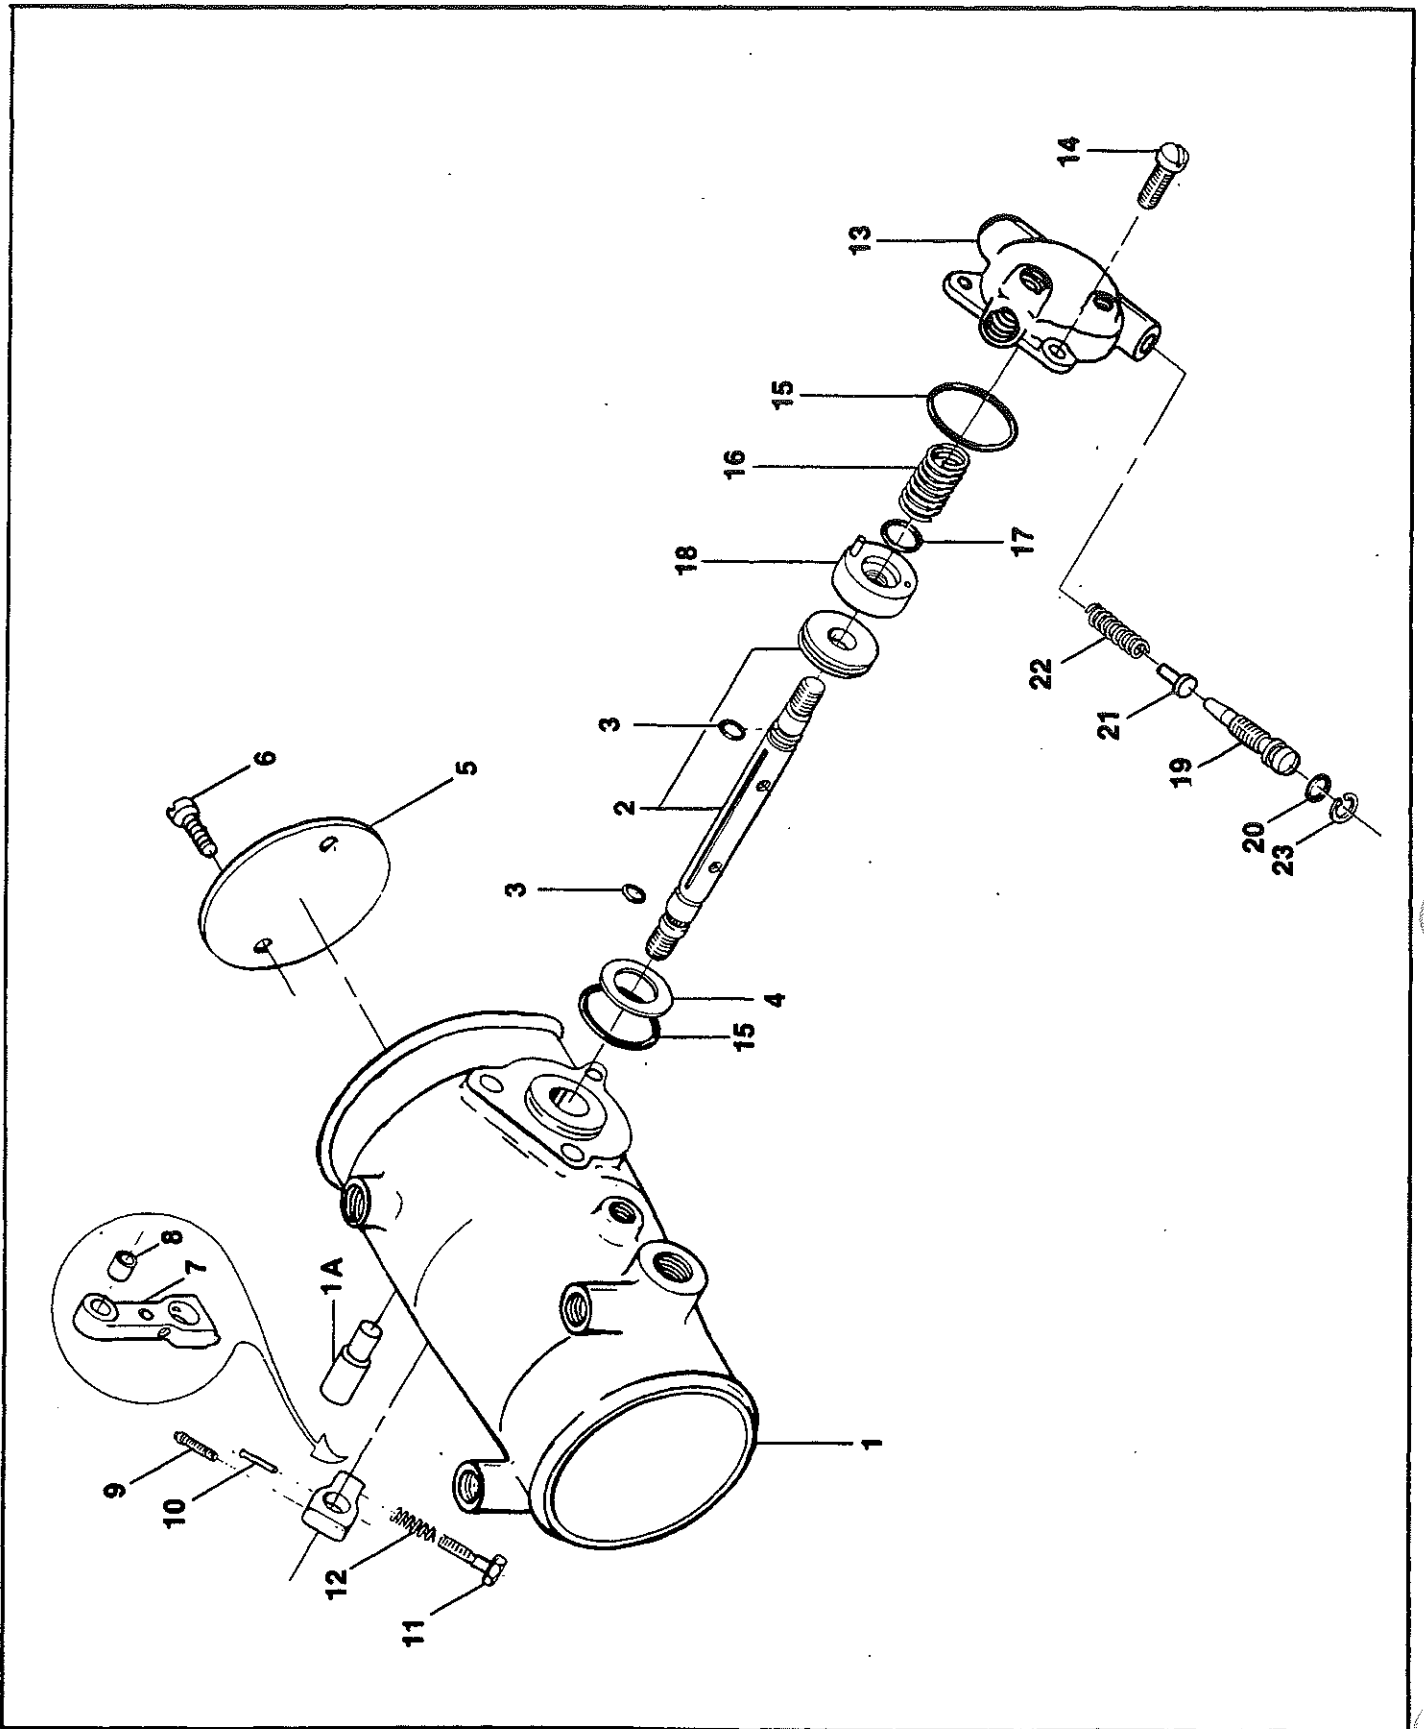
AIR THROTTLE & FUEL METERING ASSEMBLY.
